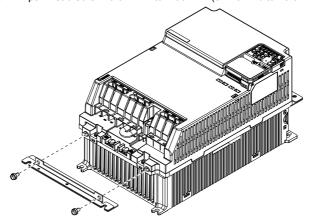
Install Bracket 2 (Bottom of the Drive)
